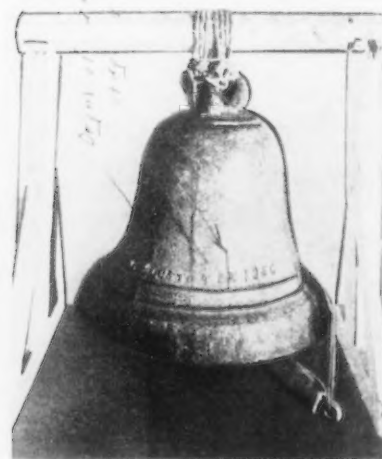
A Spanish bell of 1356, with seams caused by mold surface shrink cracks. The sand contained excessive clay bond.
